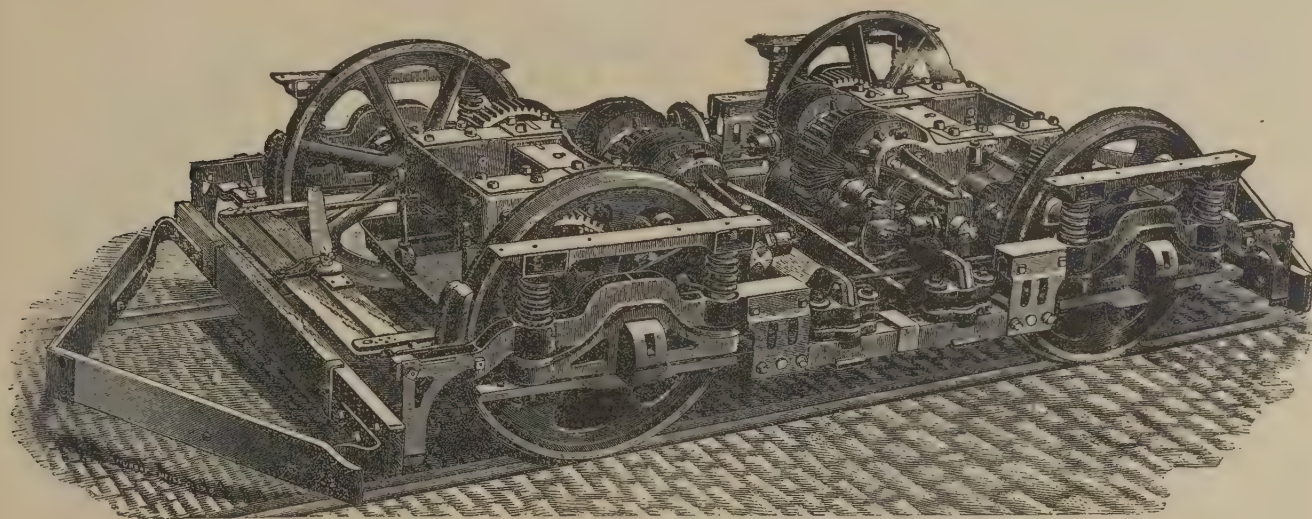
TRUCK EQUIPPED WITH THE SHORT "STANDARD" MOTORS.
